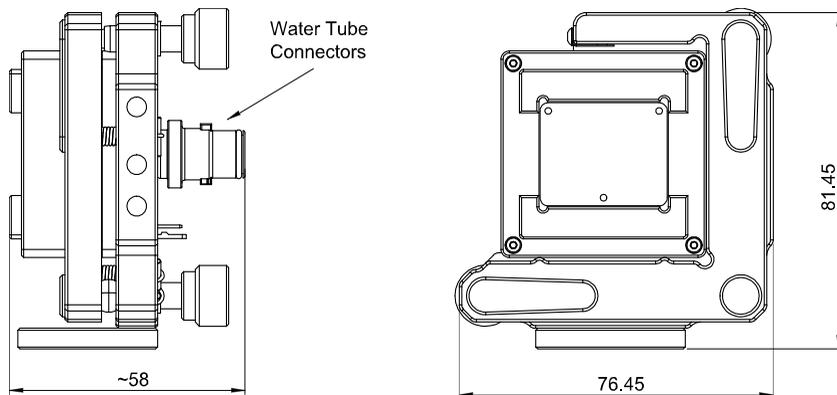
TMS 002 head dimensions and connectors (unit: mm).
